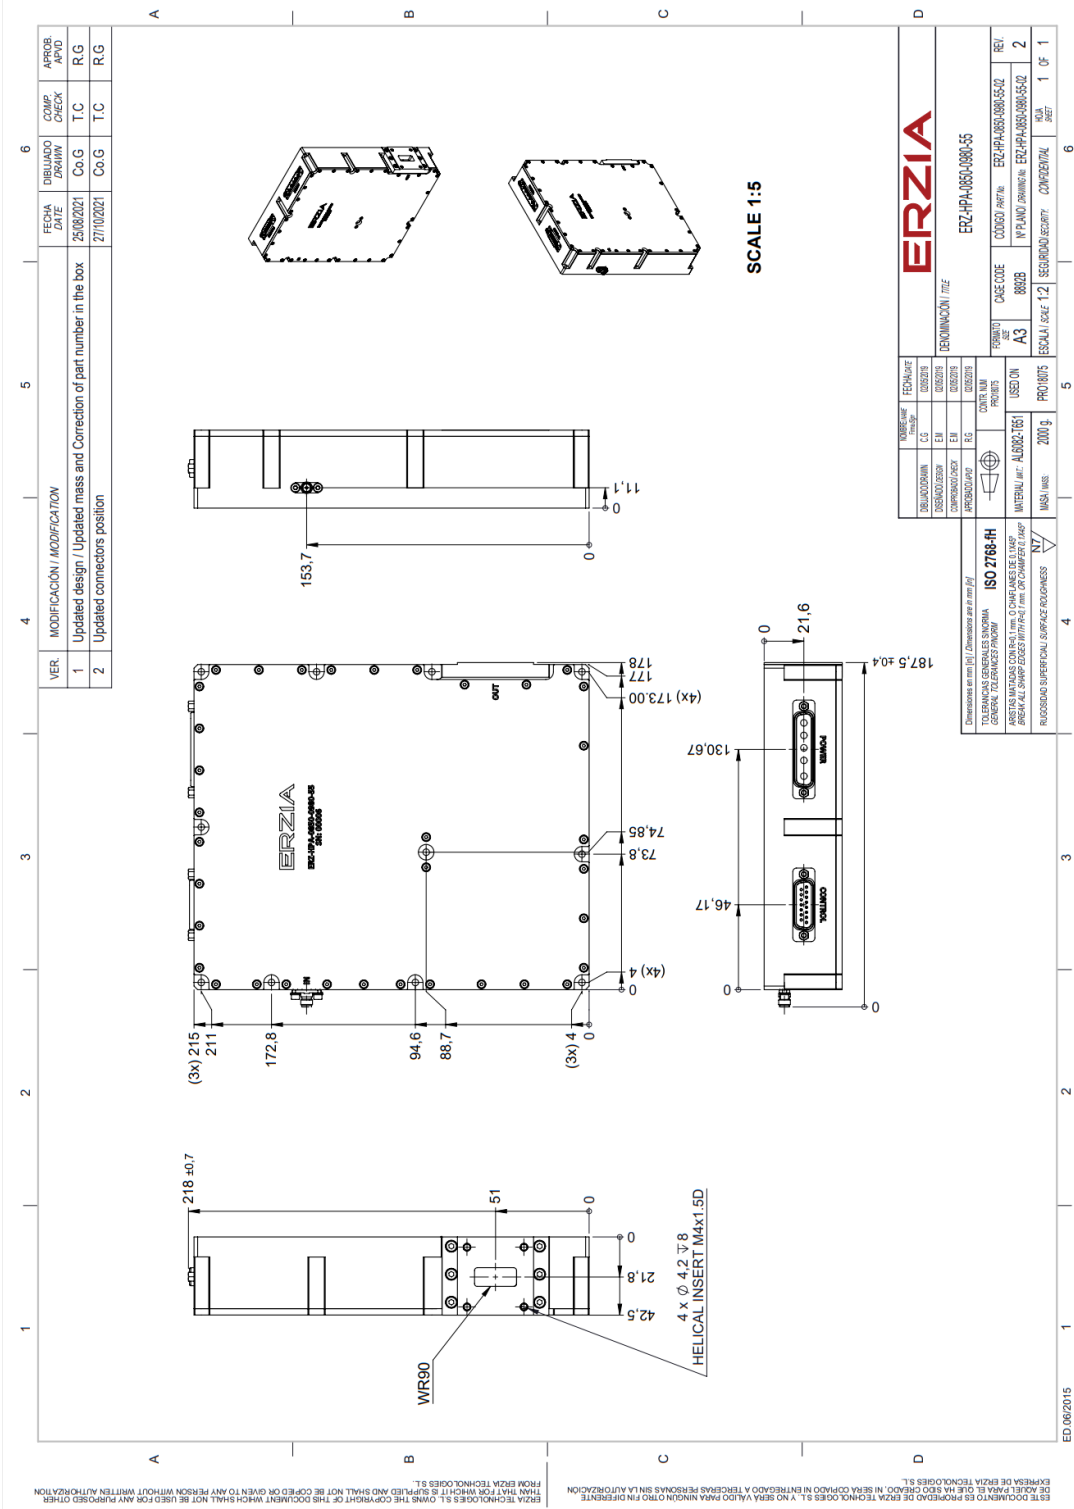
ERZ-HPA-0850-0980-55 Outline Drawing
